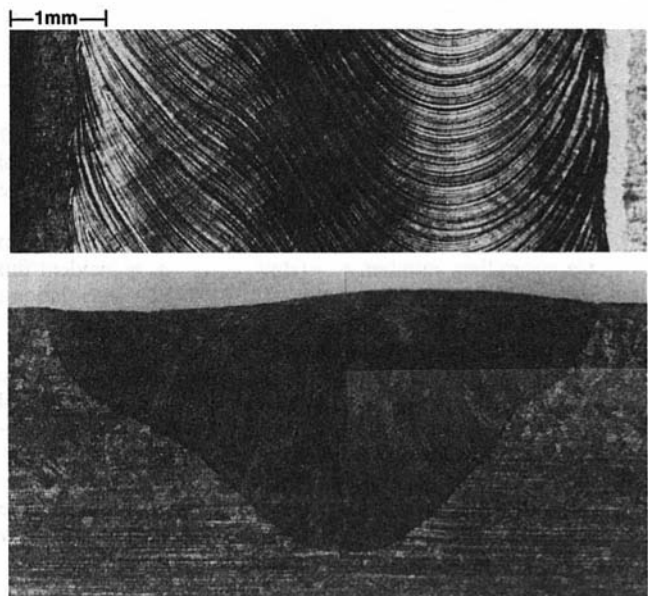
(a) Top view of surface ripples, and (b) transverse cross section of fusion zone in SS 304 irradiated by an overfocused beam with an accelerating voltage of 50 kV, welding current 30 mA, and a welding speed of 0.02 m/s
